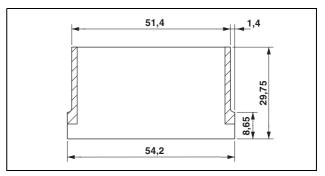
Dimensions of the PCB with housing cover ME-IO 18,8 C 5U 7035
